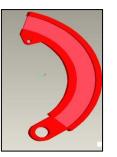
Brake Shoe 4.2 Covering Plate Outer diameter of plate = 249mm; Material of plate= Mild Steel; Thickness of plate = 15mm; Bore Diameter of plate = 60 mm; Central plate diameter = 118 mm; Thickness of base = 5mm; Depth of groove= 10mm; Distance of slots=3mm (from outer diameter); Number of slots=4.
